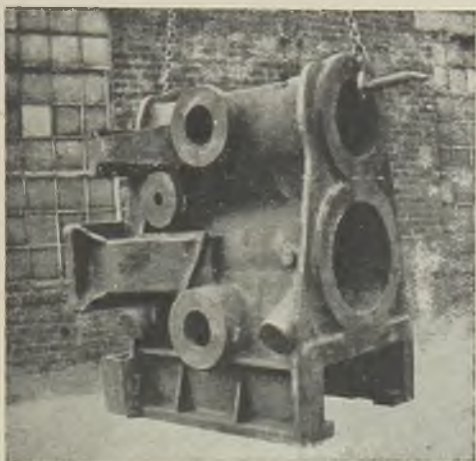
STEAM CYLINDER FOR MARINE ENGINE.
